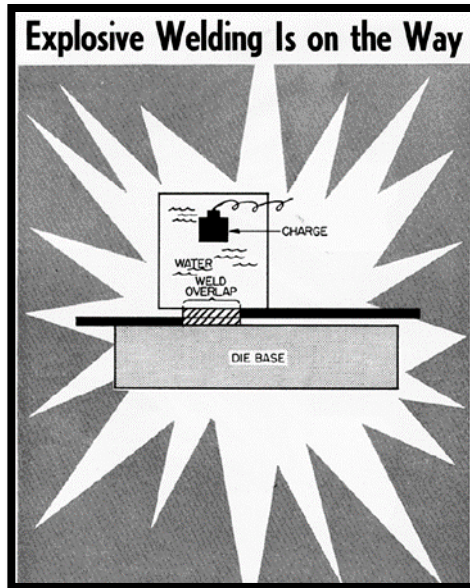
Figure showing the AP&CC explosive welding process from Vasil Philipchuk's article "Explosive Welding is on the Way" in *Welding Engineer* from April of 1959. [29]
